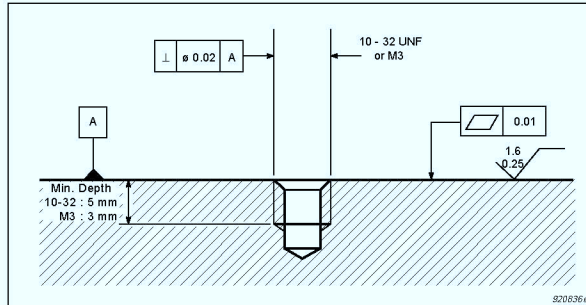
Recommended tolerances for the mounting surfaces. Dimensions and symbols in accordance with ISO 1101
